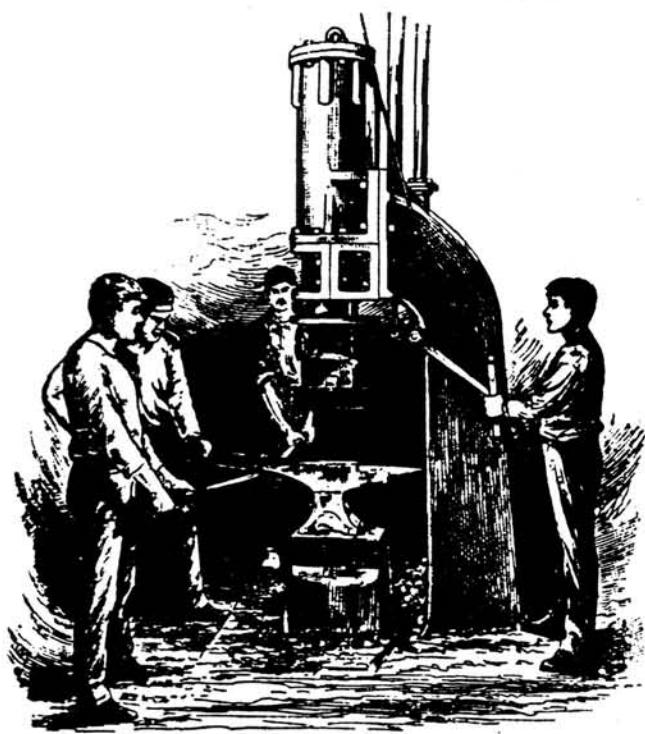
Welding top and bottom parts under steam hammer.
